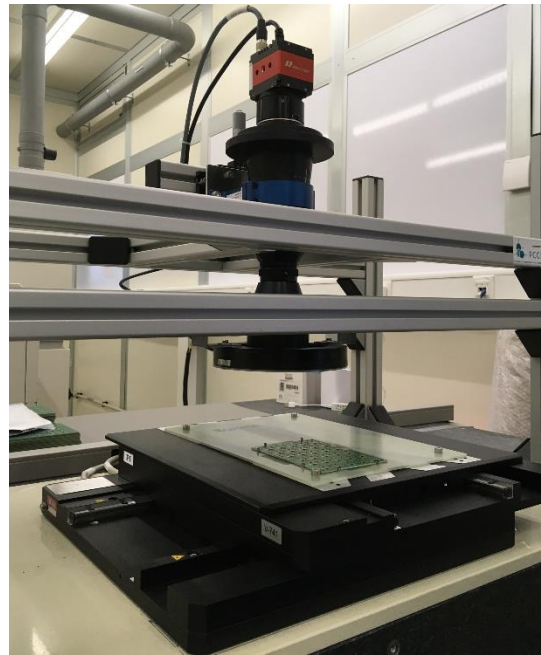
Inspection setup for the detection of PCB defects on gold areas. An XY stage moves the PCBs under the camera. Photometric imaging is performed with a segmented ring light and a high resolution camera so that four image acquisitions can be taken of each PCB from different illumination directions.
